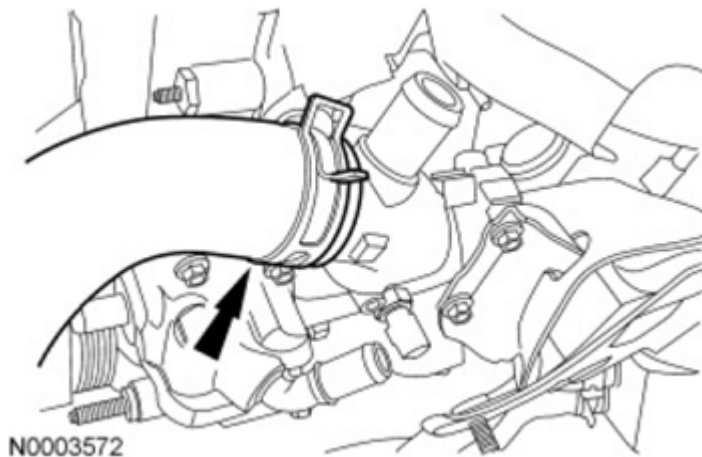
Locating Lower Radiator Hose On Oil Filter Adapter
